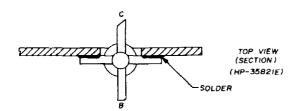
Mounting the transistor on the transistor-mounting plate. After the transistor is installed the mounting plate is attached to the center partition (see fig. 4).
